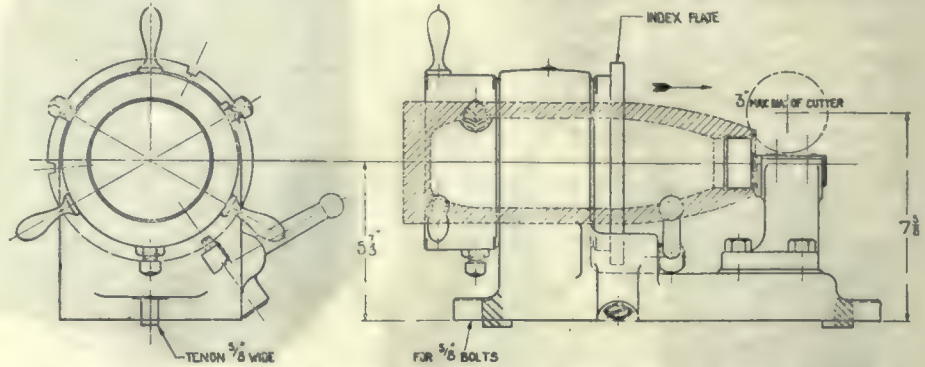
TYPE "C" FIXTURE FOR 4.5-INCH SHELLS.
